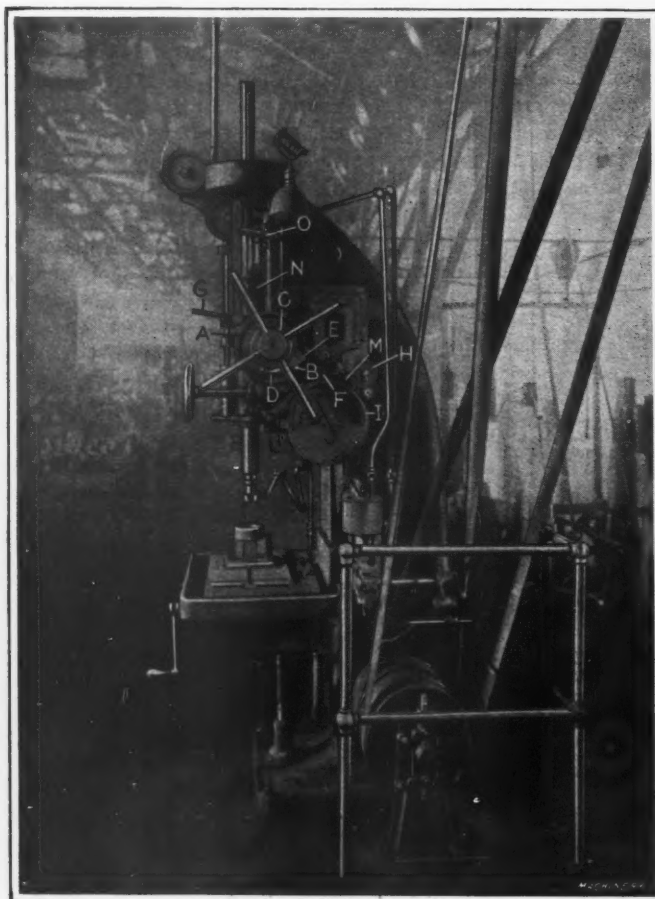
Mechanism of Compressed-air Control for Spindle Reverse, shown in Place on Machine in Fig. 3
